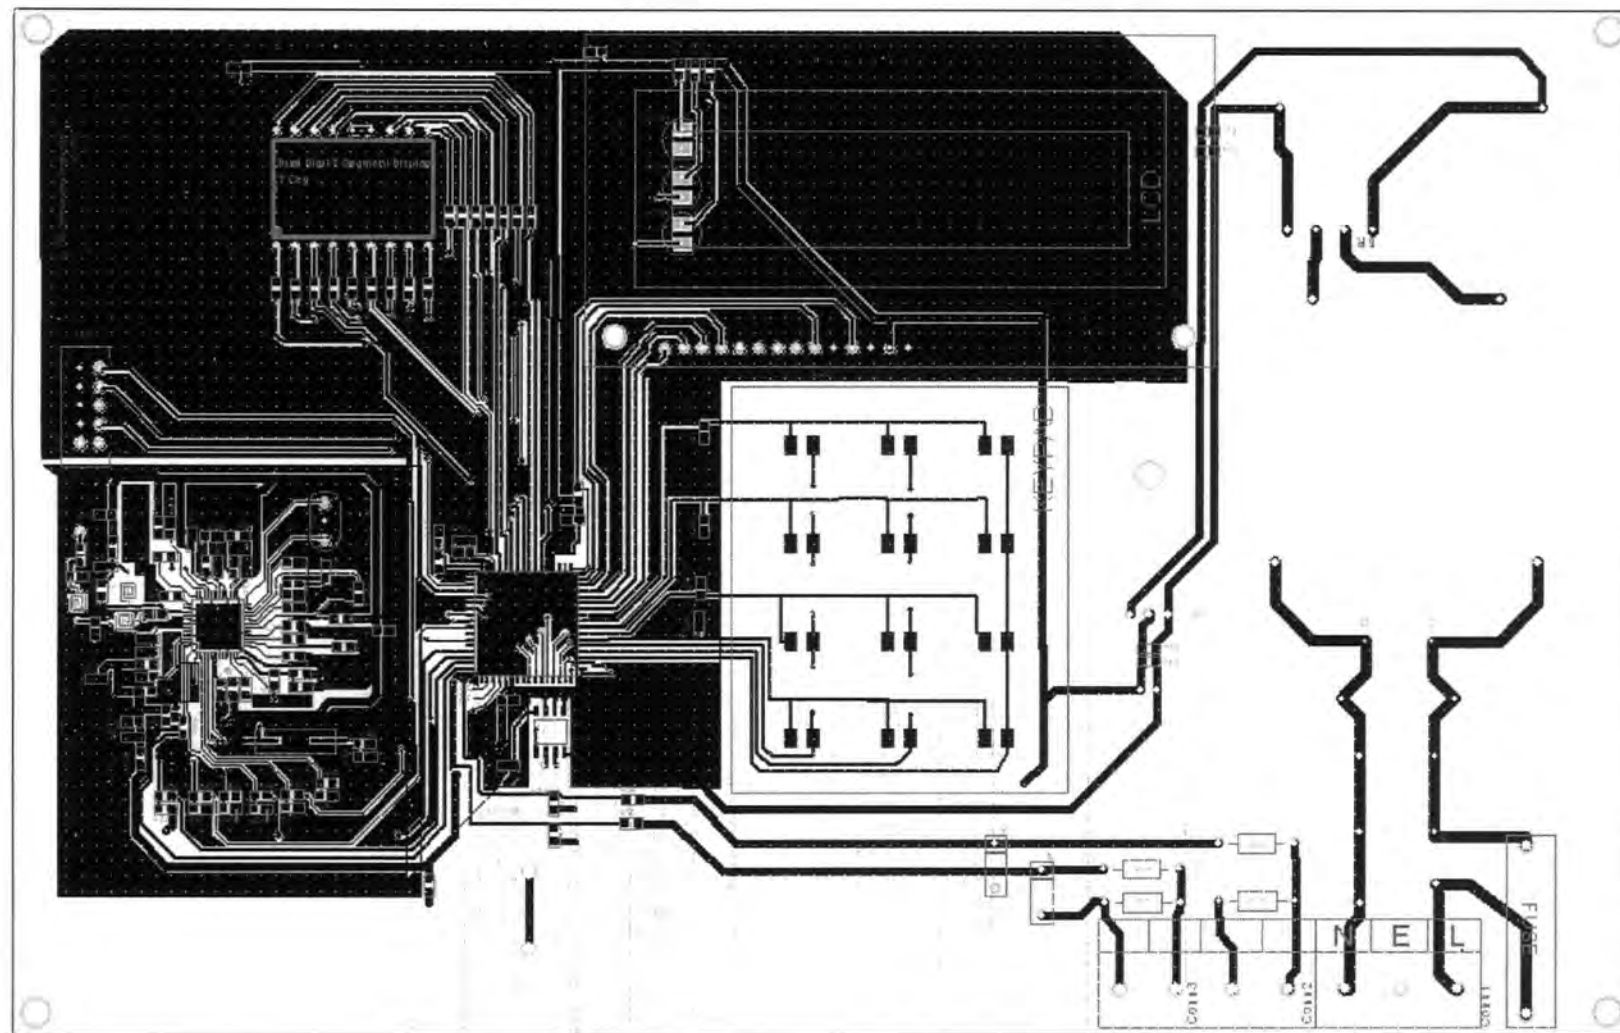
Pre-Production Controller PCB Layout (Top Layout)
